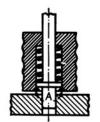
In this design, the plunger is retained by staking or spinning over the hole at A.
